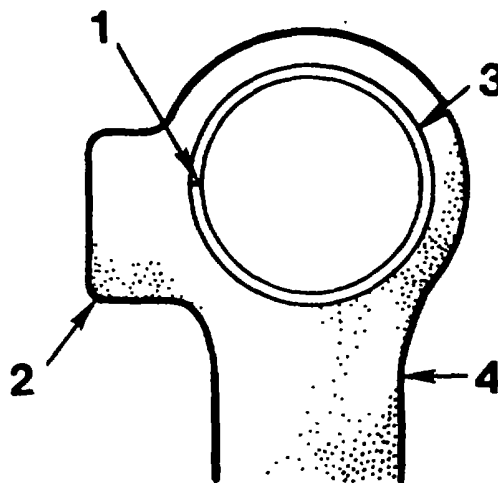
Removing Piston Pin Bushing from Connecting Rod
